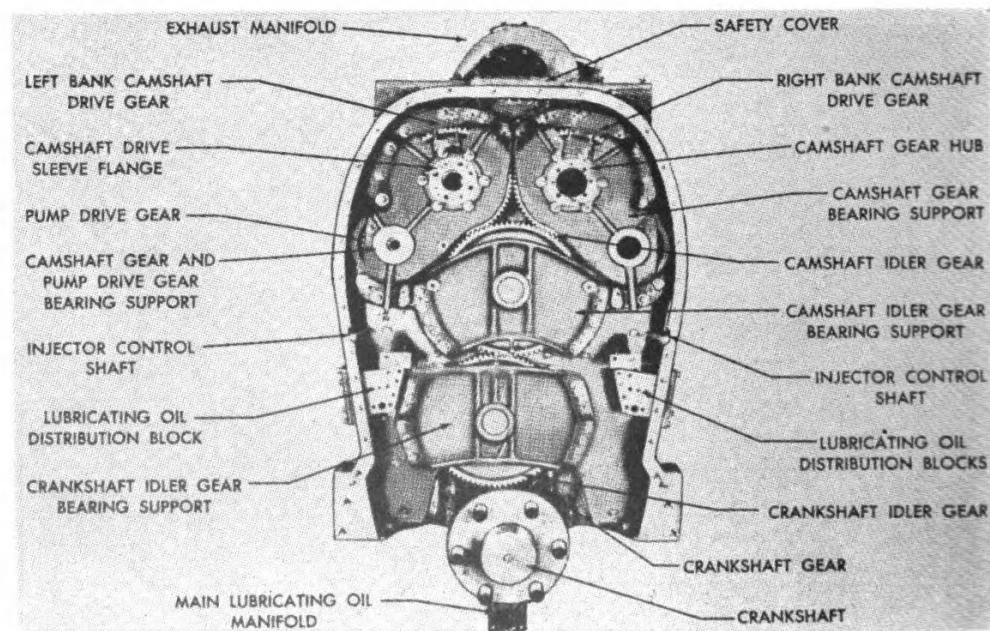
Camshaft drive assembly, V-type engine (GM 16-278A).
